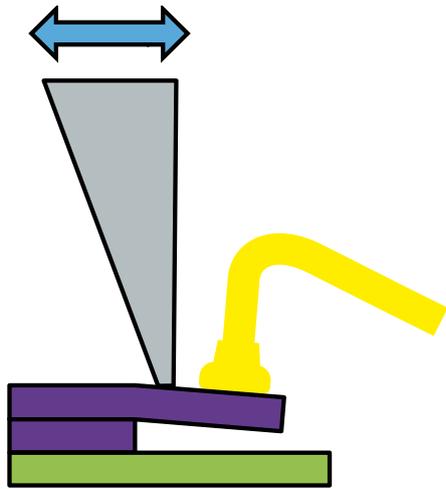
Shear tool lands and oscillates producing a measurable force on the transducer
